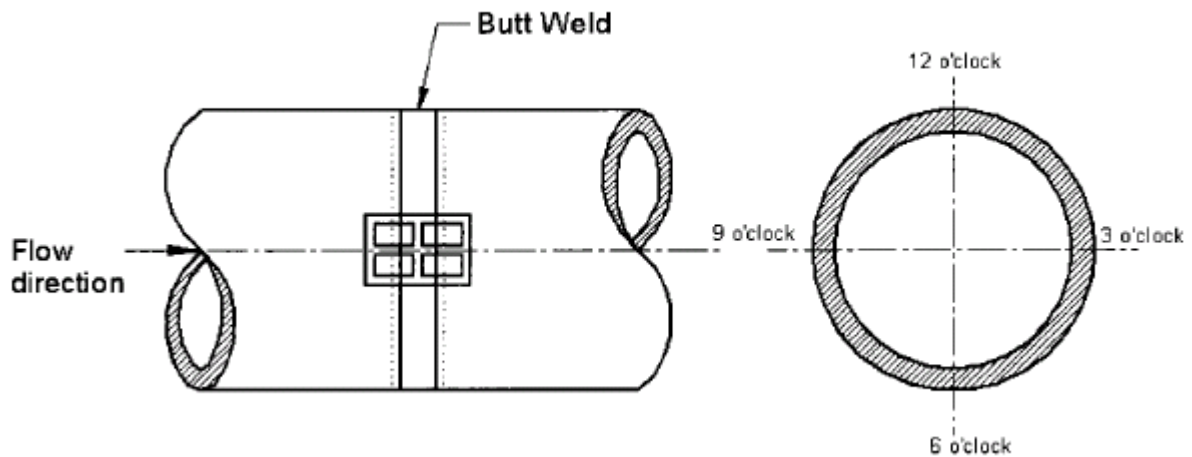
Typical Butt Weld positions to be replicated.
